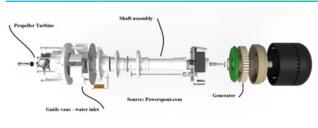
Propeller Turbine Generator (Exploded view)<sup>34</sup>
